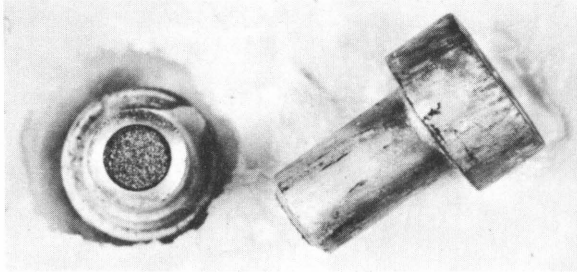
Fracture Surface from Tensile Test of Irradiated 212-B (Charge A)
